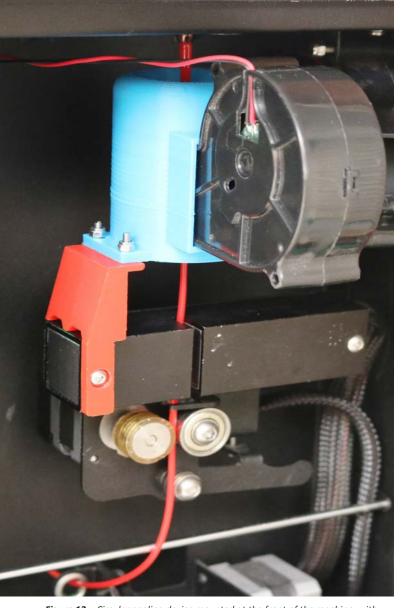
Circular cooling device mounted at the front of the machine, with one fan plugged in
